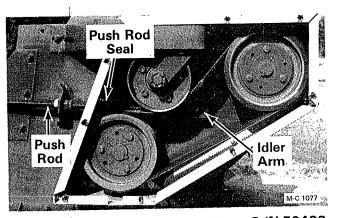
Idler Push Rod Ass'y. Above S/N 50438
